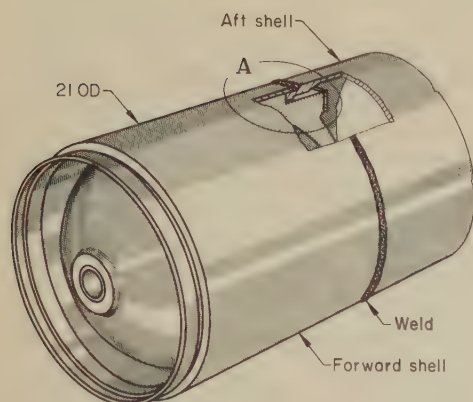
Aircraft drive-shaft assembly for which submerged-arc welding was selected on the basis of weld quality and production rate (Example 223)
